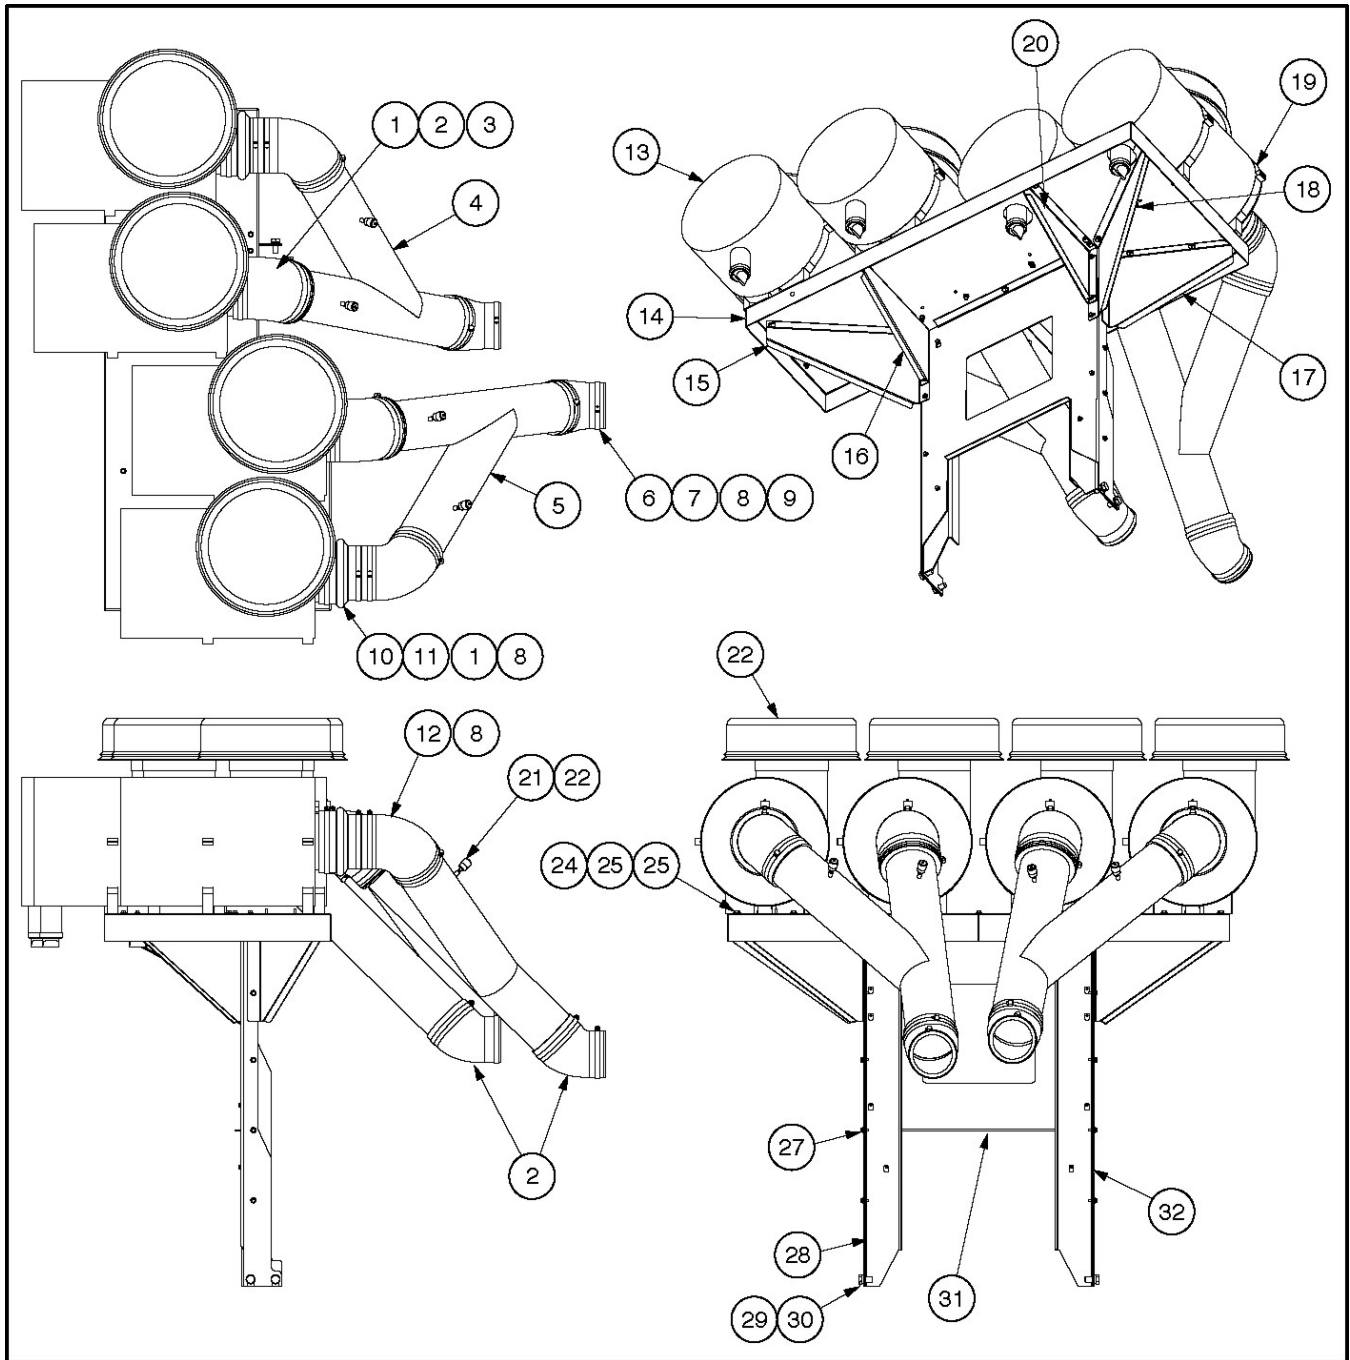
HEAVY DUTY AIR CLEANER PARTS
